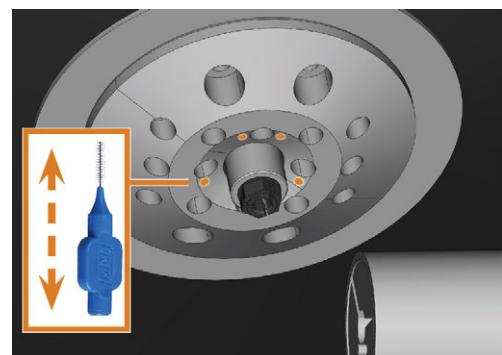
CLEANING THE NOZZLE PLATE; NOZZLES MARKED ORANGE (THE NUMBER OF NOZZLES IN YOUR MACHINE MAY BE DIFFERENT)
